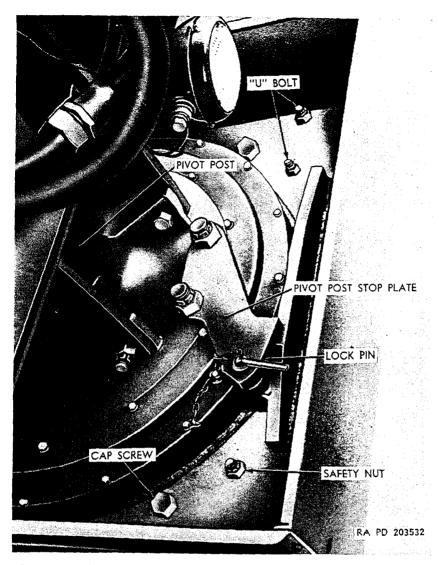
Lower section of crane pivot post and base plate (M246)—left rear view.
